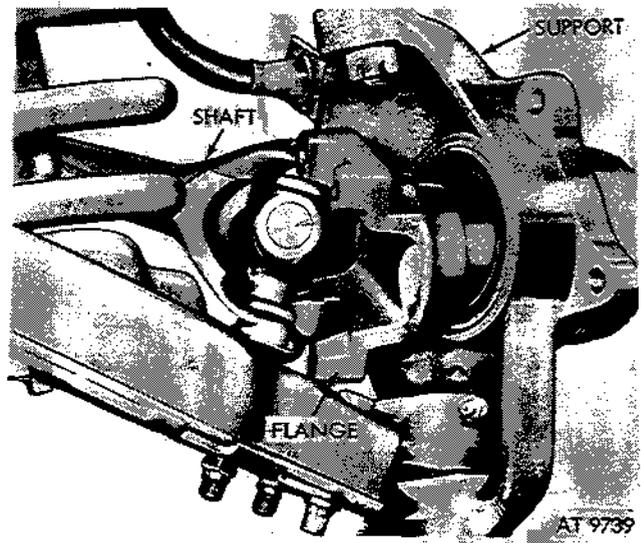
Position shaft to permit removal of wheel drive flange from support.
